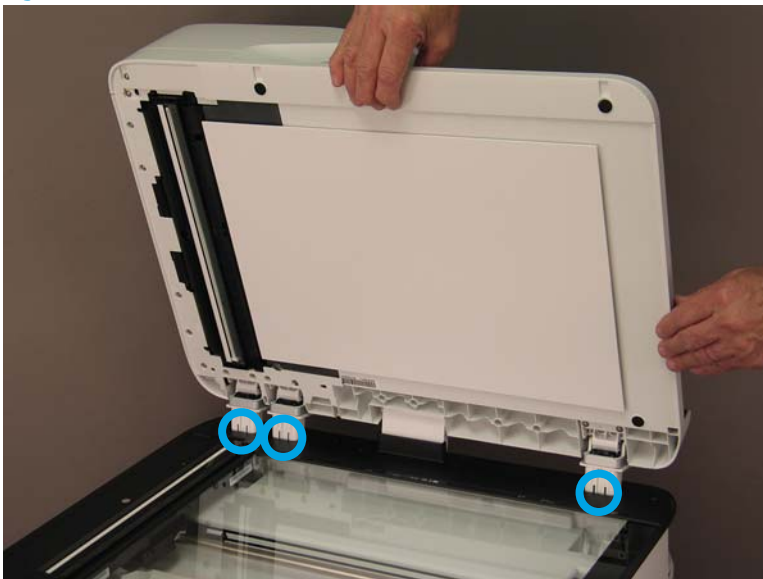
Remove two screws (2 of 2) (P774/P779)
